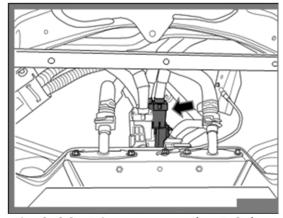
Disconnect the DC bus assembly fixing clips and take off DC bus assembly.
